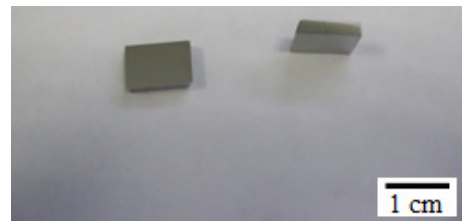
Transverse and longitudinal cross-section of hardened specimen
